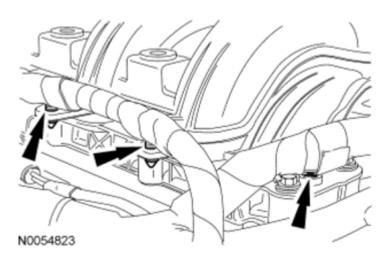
Locating Throttle Body Electrical Connector Courtesy of FORD MOTOR CO.
